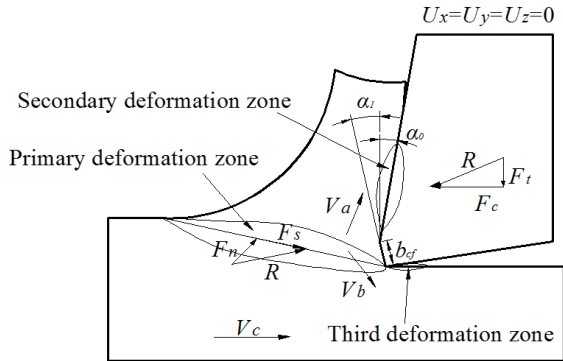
Schematic view of metal cutting process with double chamfered tool
